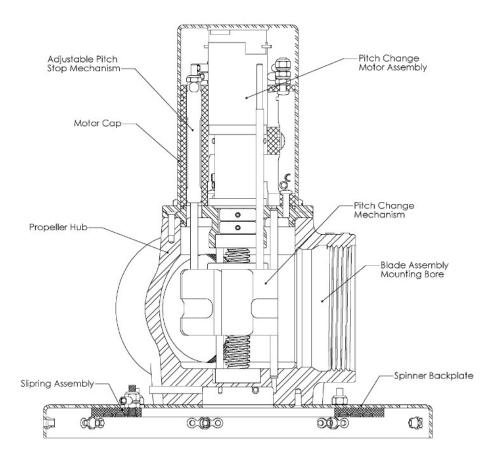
General Layout of Propeller Hub Assembly (AP332 shown)
